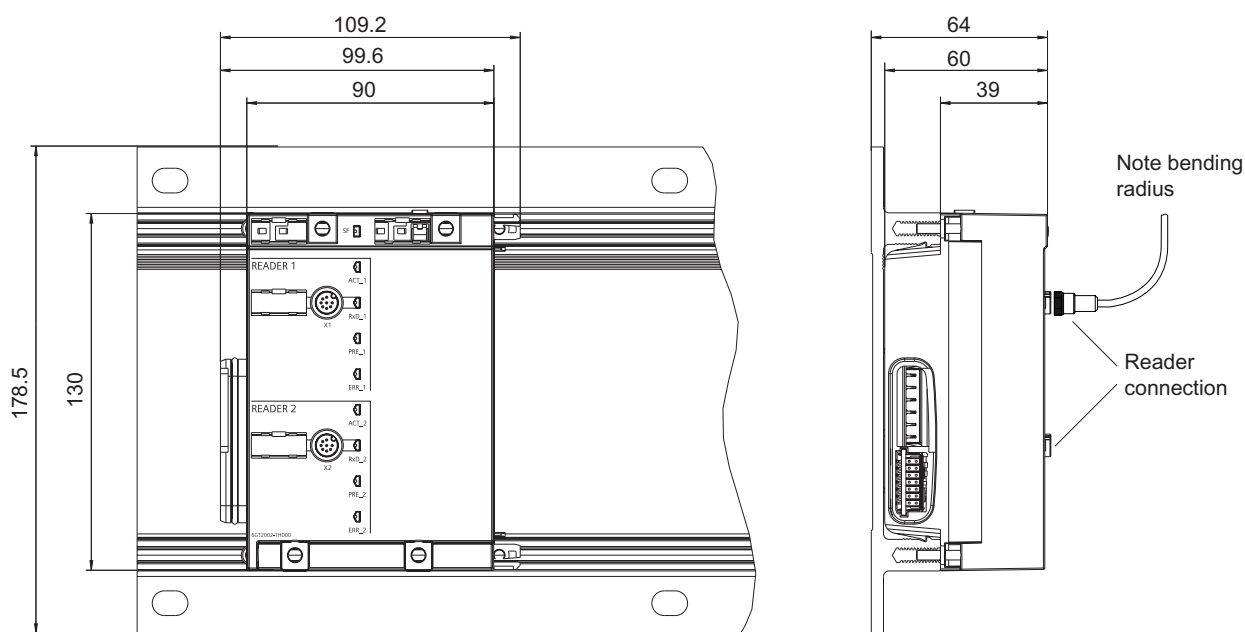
Dimension drawing for RF170C communication module with connection module on mounting rack, narrow
